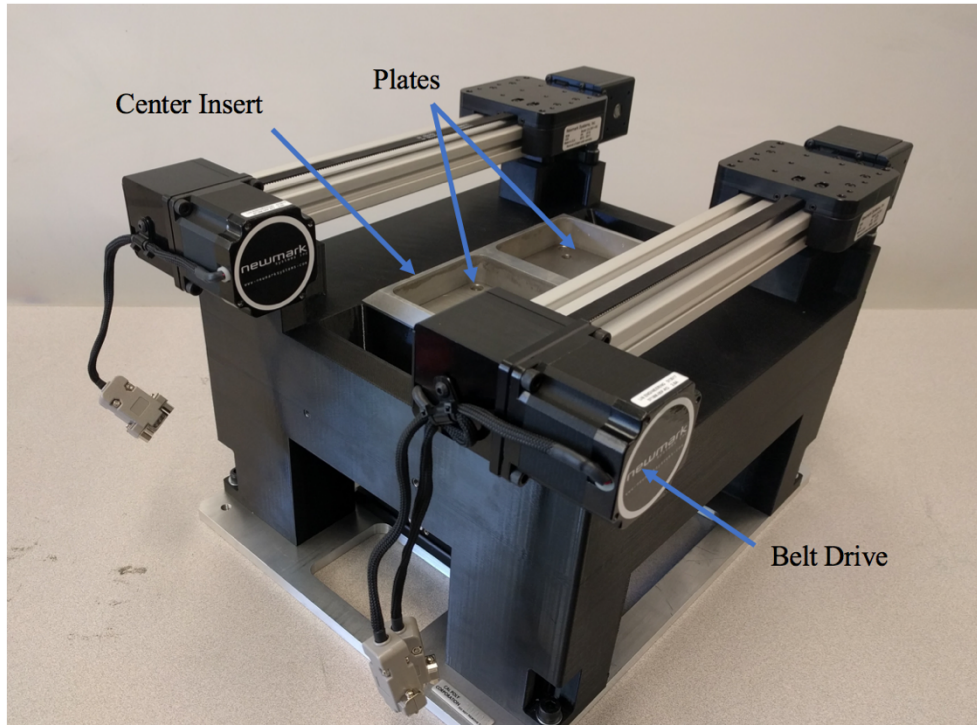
Powder spreader top view showing the center insert that holds the plates that form the base of the build and supply sections.
